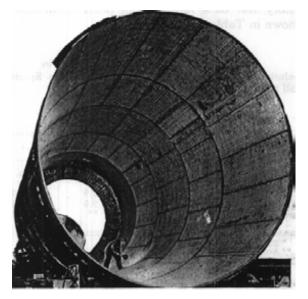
Section. of a large petroleum fractionating tower. The top part is lined with MONEL alloy 400 sheet to withstand corrosion by dilute HCl formed by hydrolysis of brine in the petroleum.
